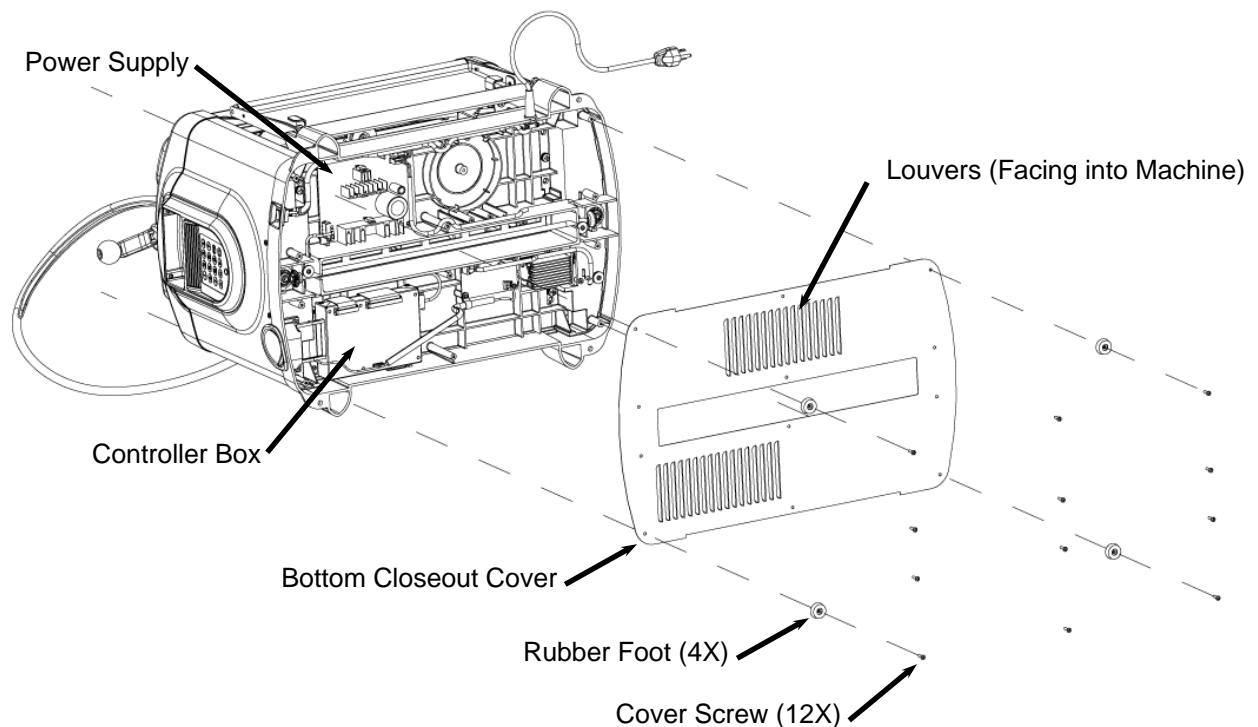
REMOVAL OF THE BOTTOM COVER
